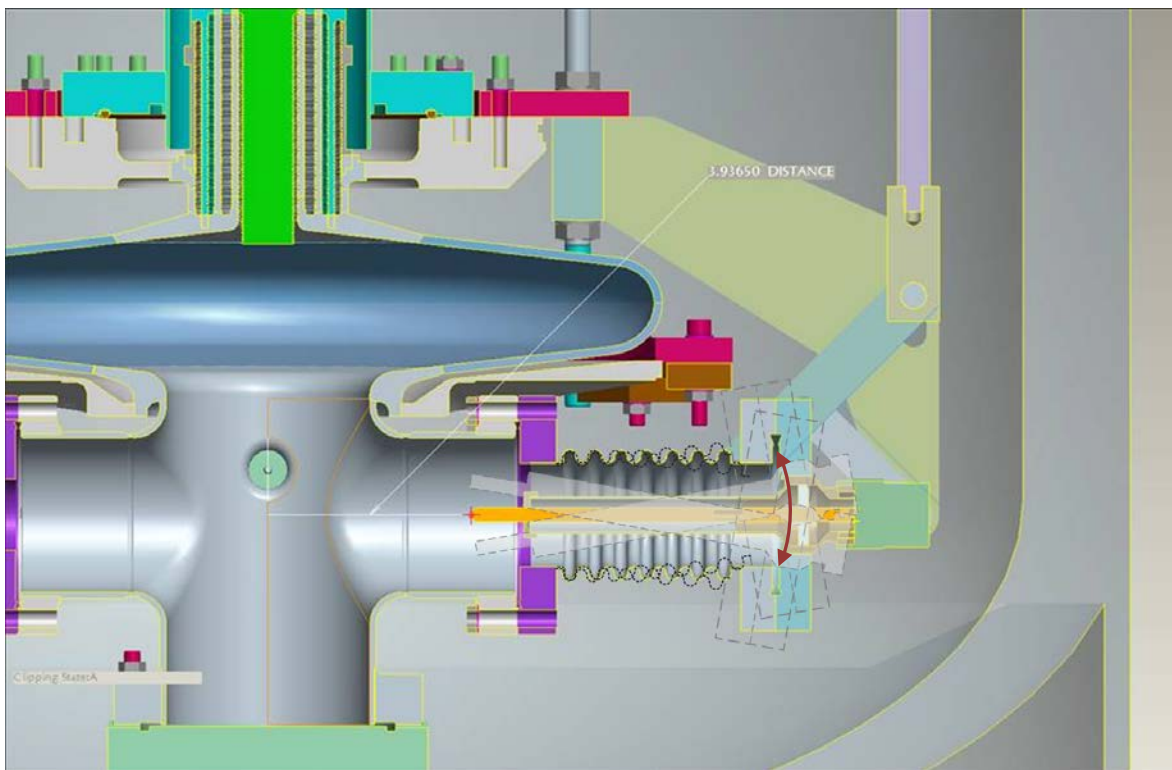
Schematic of experimental assembly showing full drive assembly.
